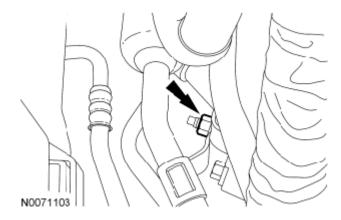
Locating Lower Radiator Hose Courtesy of FORD MOTOR CO.
